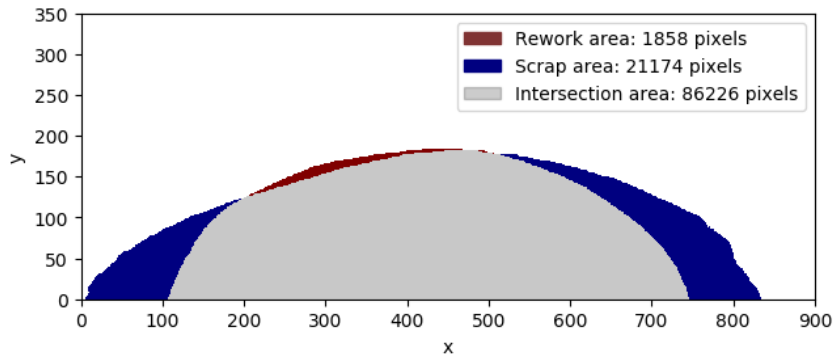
Scrap and rework areas of the 21-st experimental weld bead
